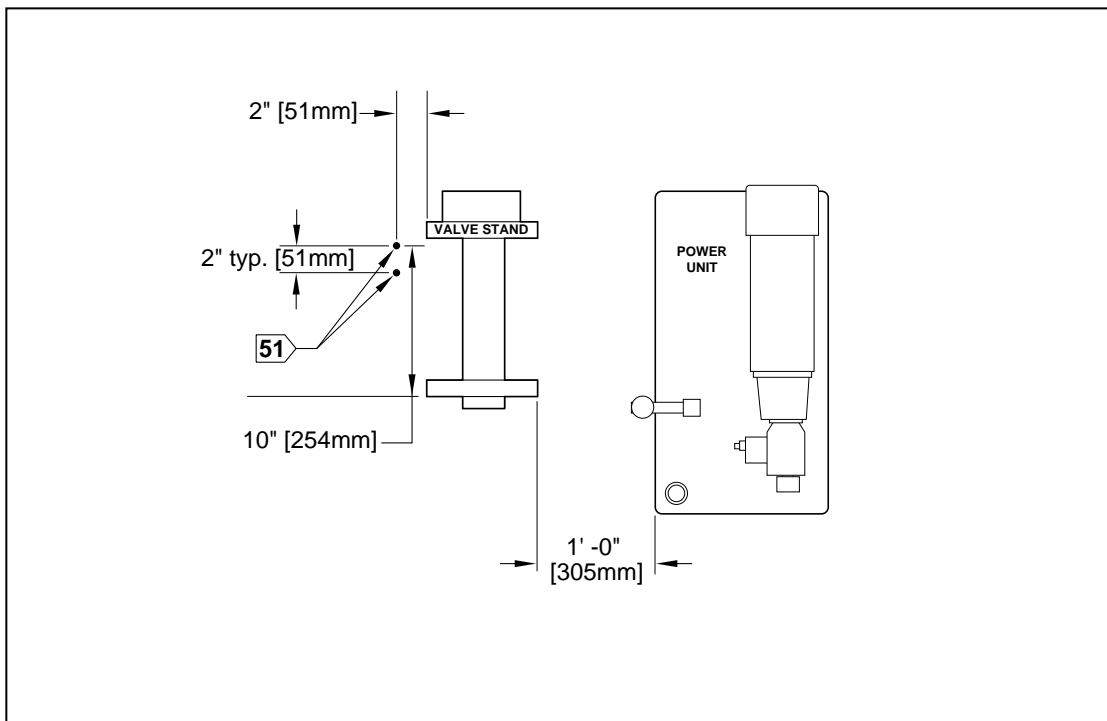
STANDARD LOCATION FOR HYDRAULIC VALVE STAND AND 20 G.P.M. POWER UNIT FOR RACK CONVEYOR (SEE INSTALLATION DRAWING FOR LOCATION).
